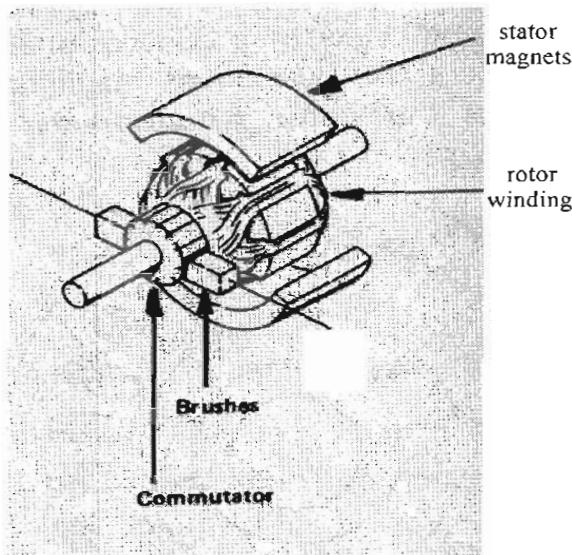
Exploded view of a dc motor; source: Engineering Handbook by Electro-Craft Corp.
